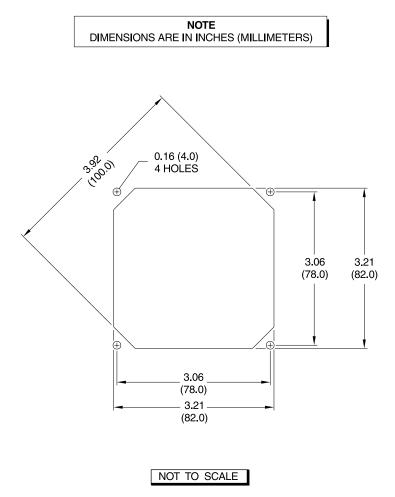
Instrument Panel Cutout and Mounting Holes
